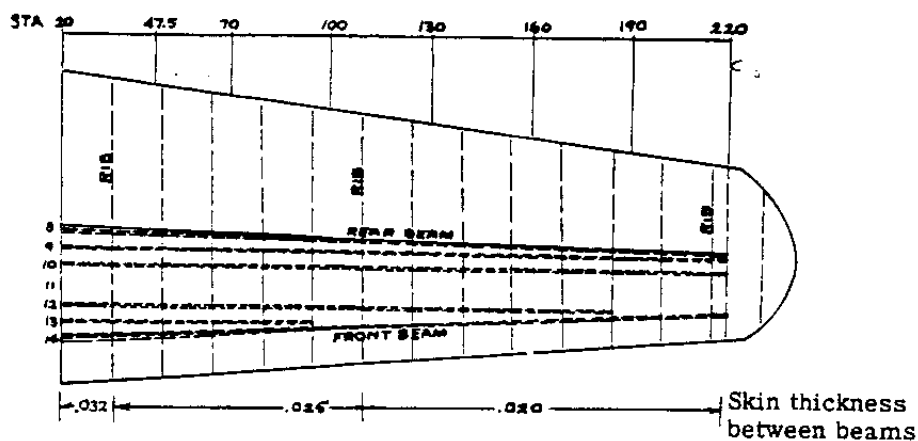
Structural Layout of Tapered Cantilever Wing
